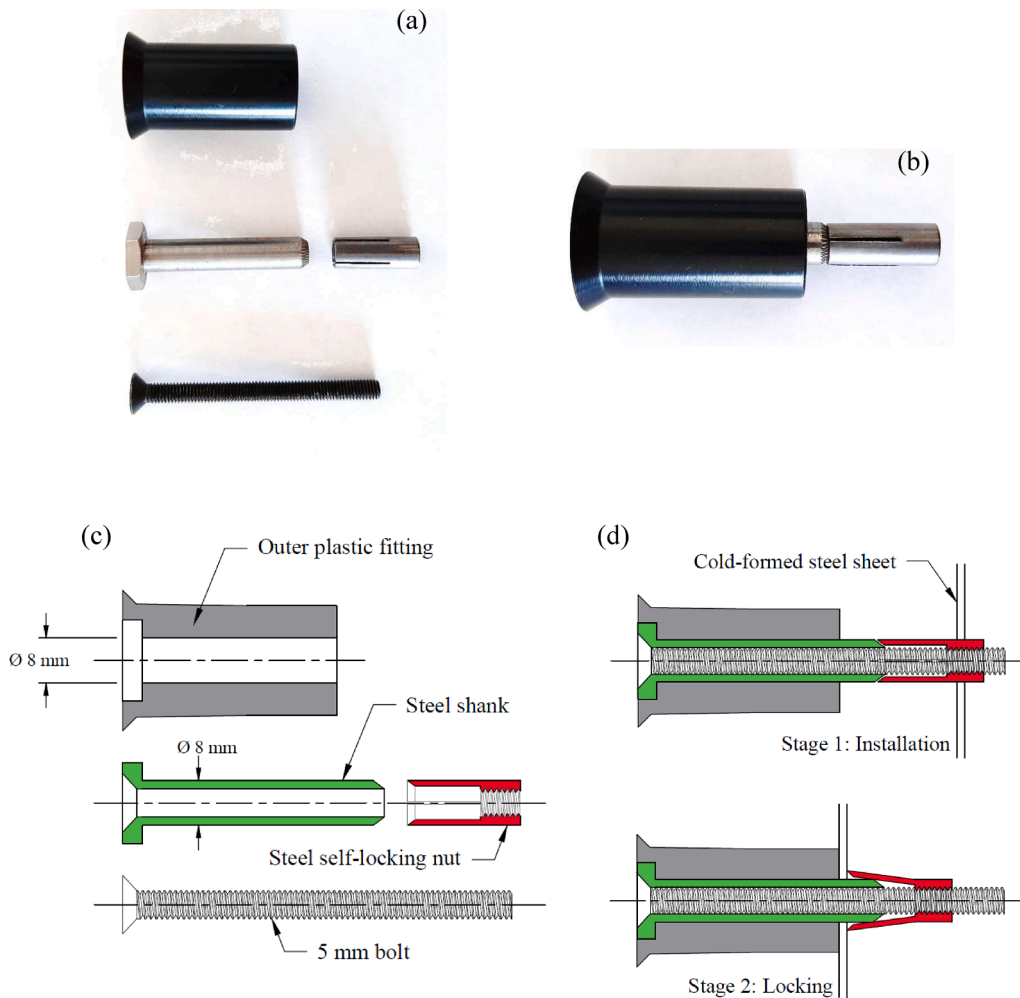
Type 3 connector (a) Dismantled, (b) Assembled, (c) Cross-sectional details, (d) Assembly detail.
